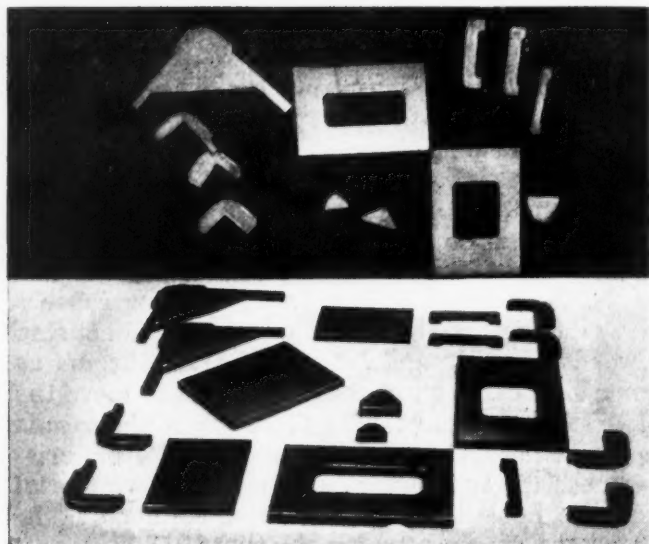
By Using Templates of Heavy Paper (Shown in Background), the Various Pieces of a Jig are Gas-cut out of Machine Steel
